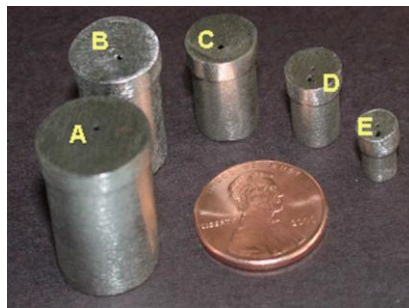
Centimeter-scale multilayer mumetal shields fabricated using conventional machining methods compared to the size of a penny [19].
